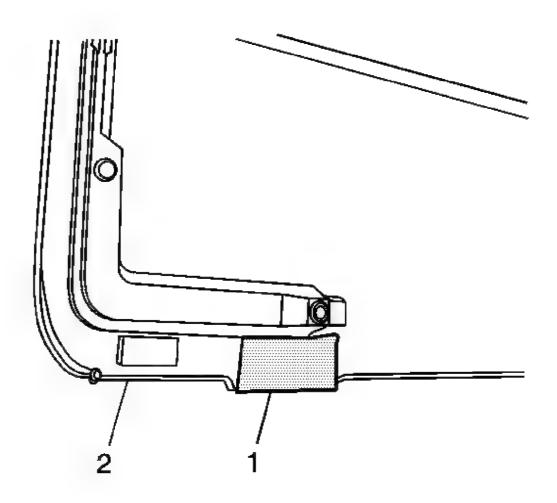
Identifying Sunshade Courtesy of GENERAL MOTORS CORP.
